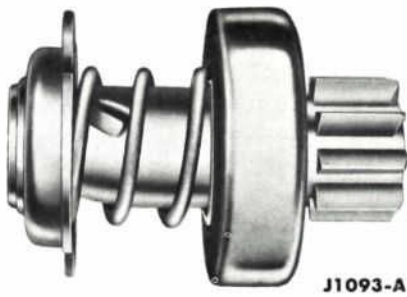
Falcon and Econoline 6-Cylinder Engine Starter Drive
